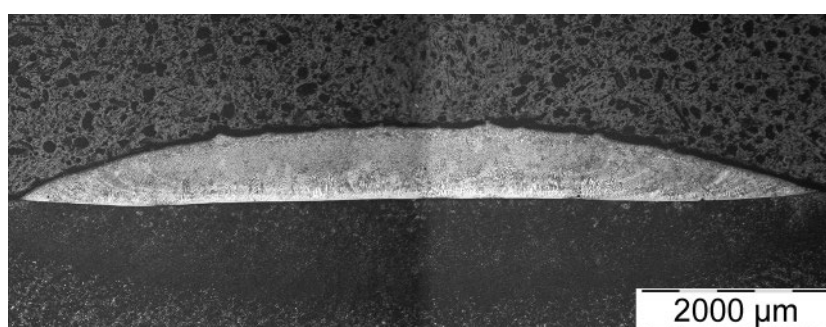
Cross-section of a laser material deposition layer (Source: Fraunhofer ILT)
